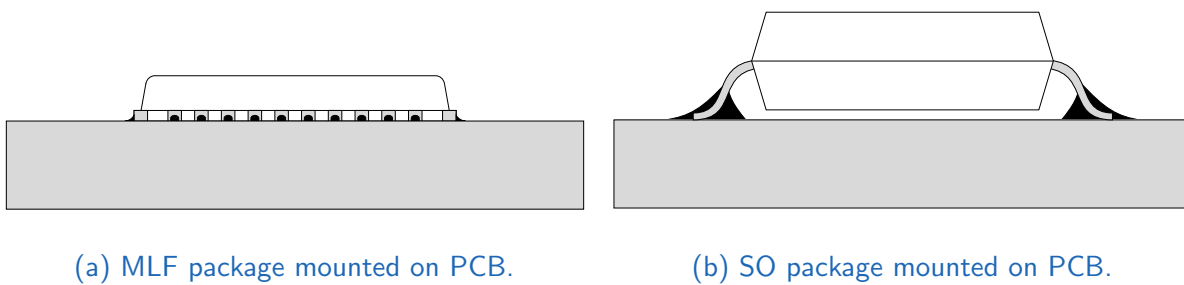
Comparison of MLF package and SO package mounted on a PCB, the elastic pins can absorb solder stress.
